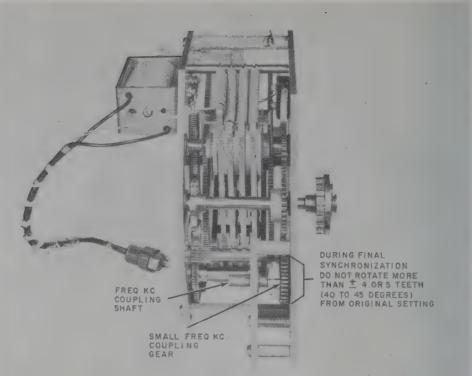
Mechanical interpolator installation, location of small and large FREQ-KC coupling gears.
